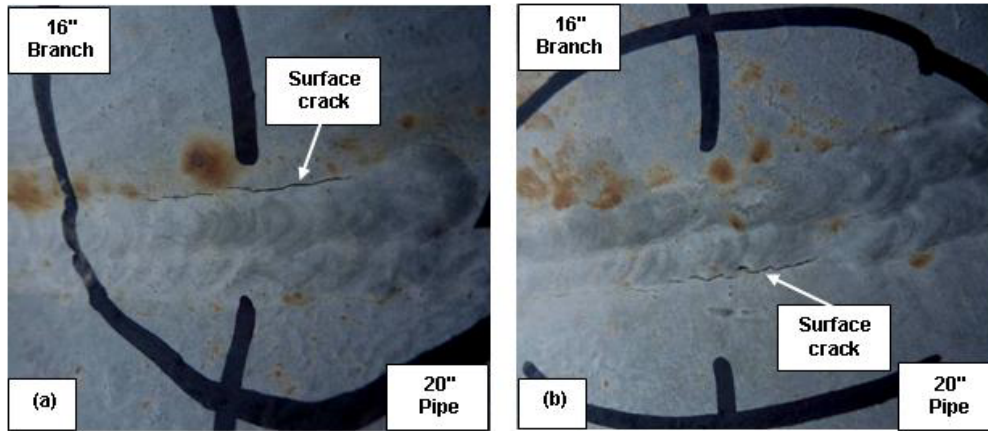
Close-up views of zones 4 and 1 at front of fracture termination zones of Fig. 1-b. Note surface cracks on both sides of circumferential weld of 16" pipe/20" header.
